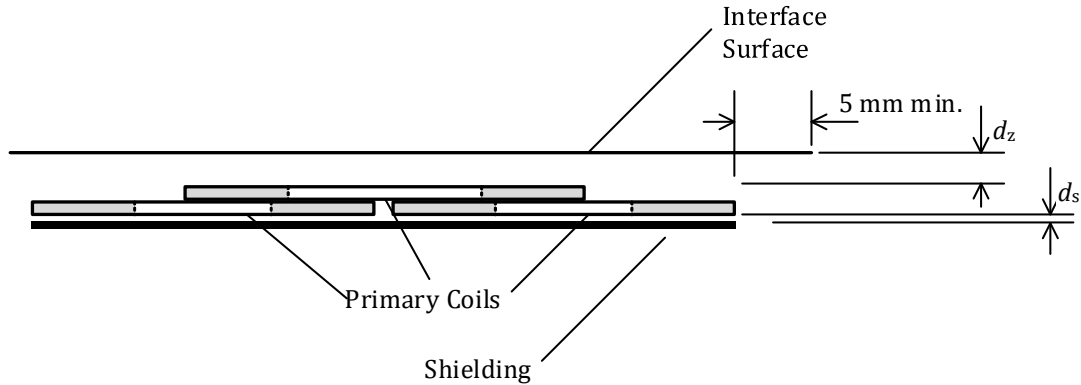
Bottom and Top Primary Coils of Power Transmitter design MP-A6
